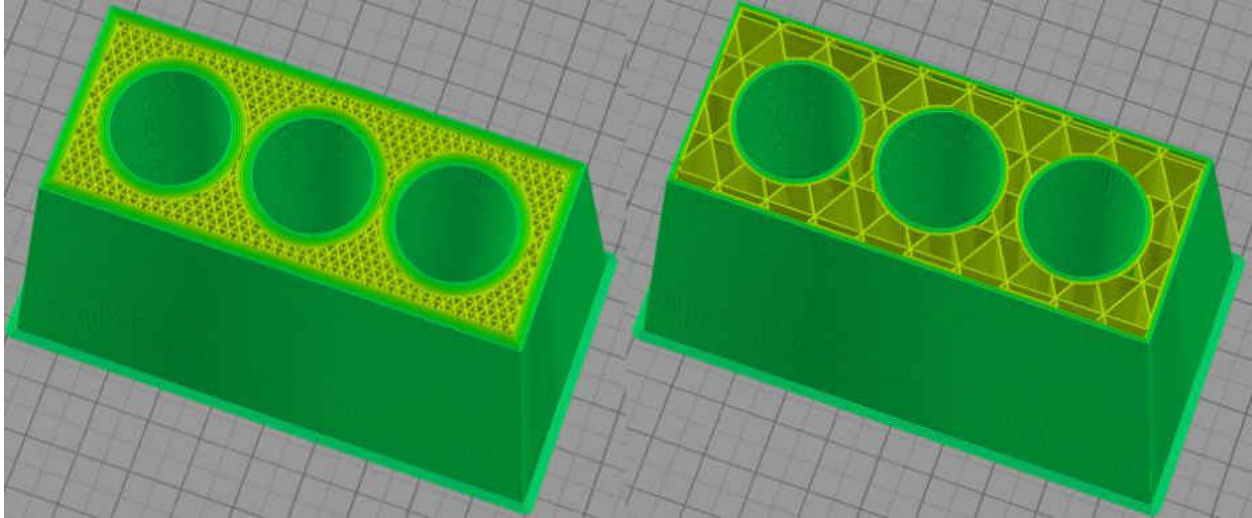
Cross-section view of printer feet prepared for printing with high infill (85%) with 5 perimeter walls (left) and low infill setting (20%) with two perimeter walls
